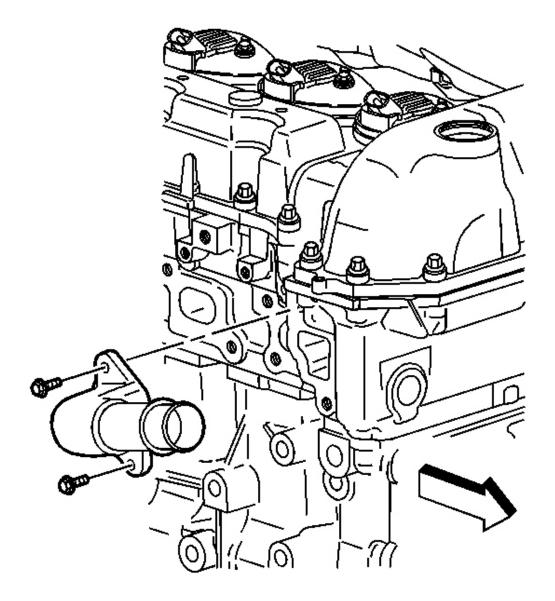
View Of Water Outlet Courtesy of GENERAL MOTORS CORP.
